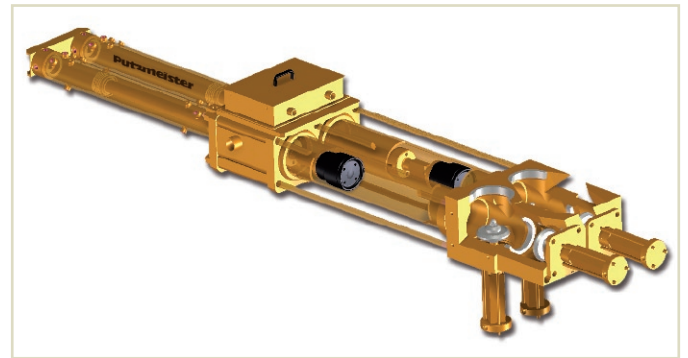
HSP pump head with hydraulically driven seat valves. The wear parts (plate and seat) are available in different material pairings and geometric designs to be selected in accordance with the pumped medium. // Bild 7. Pumpe vom Typ HSP mit hydraulisch gesteuerten Sitzventilen. Je nach Fördergut können die Sitzventile in verschiedenen Geometrien und aus verschiedenen Materialien hergestellt werden.
